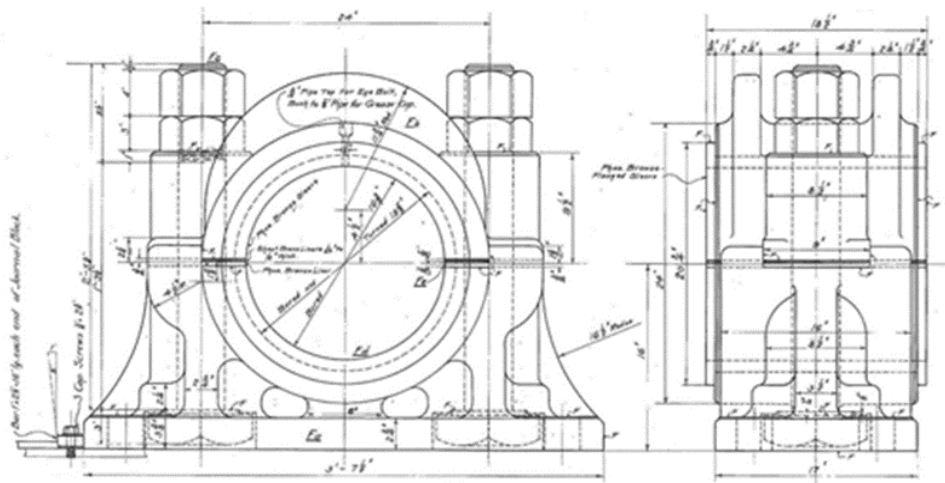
As-designed pinion shaft bearing Journal Block F, also known as the B1 bearing. Detail taken from the original bridge design drawings.
